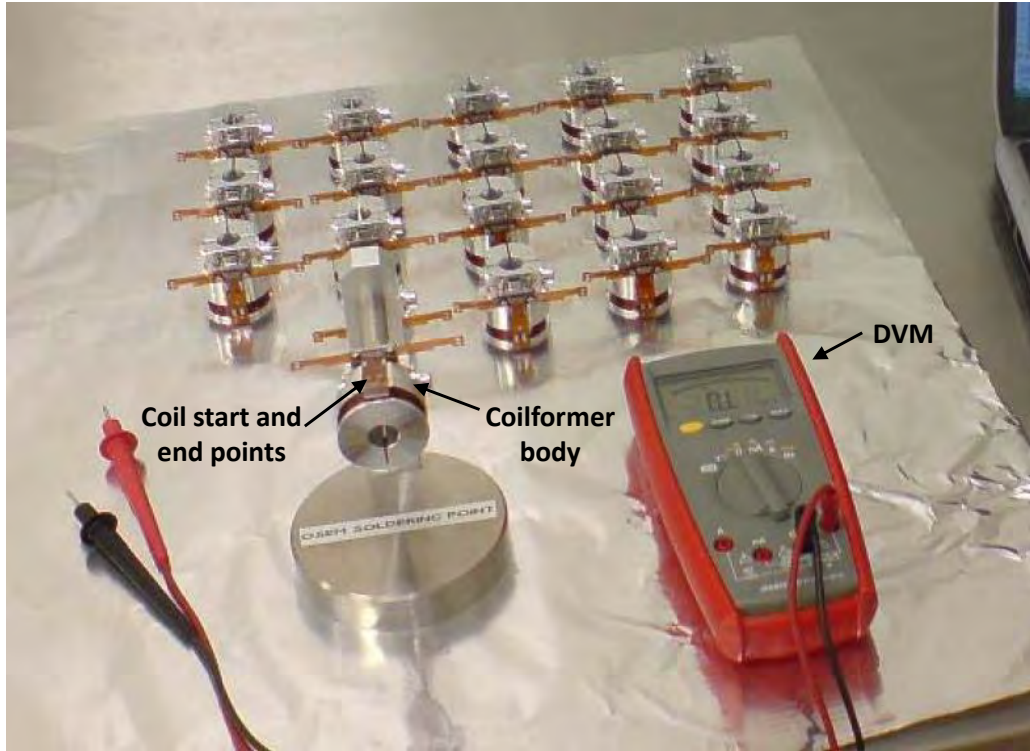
The part-assembled BOSEMs are tested between the coil and the flexi-circuit [102].
